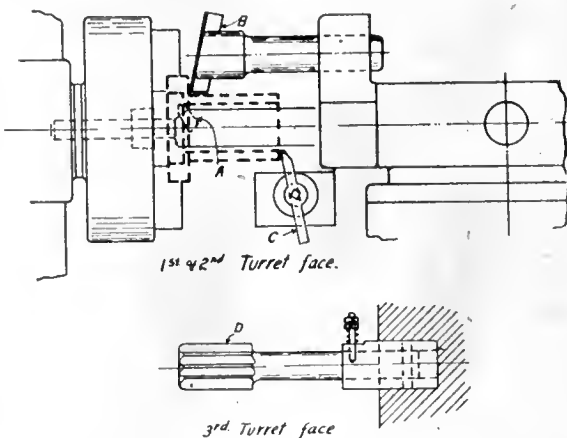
MACHINING TWO PIECES IN COMBINED FORM.
